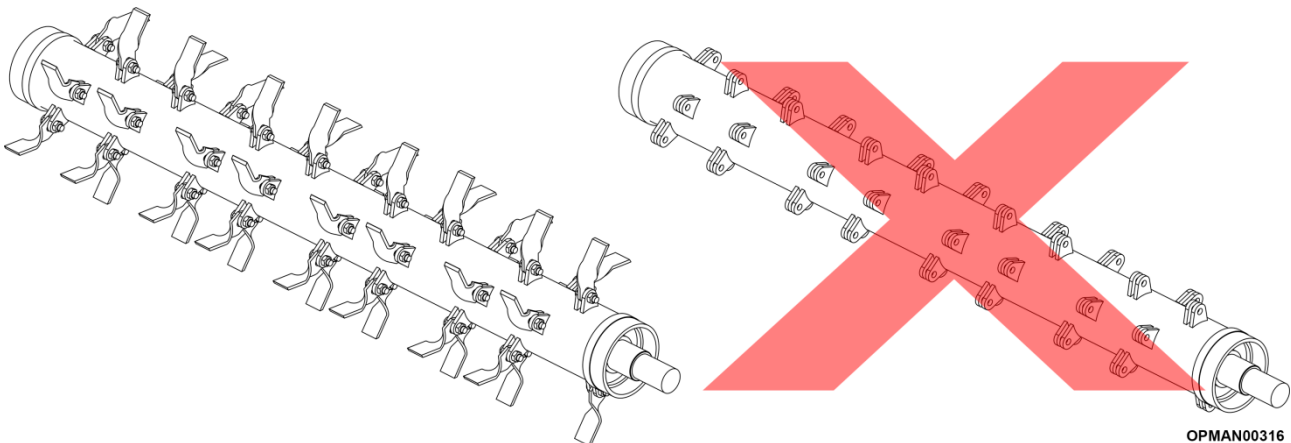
Spearhead Only Supply Complete Flail Rotor With Flails
